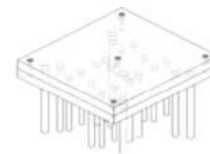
Four-cavity Motor cycle piston die mould designed with Solid Works package
